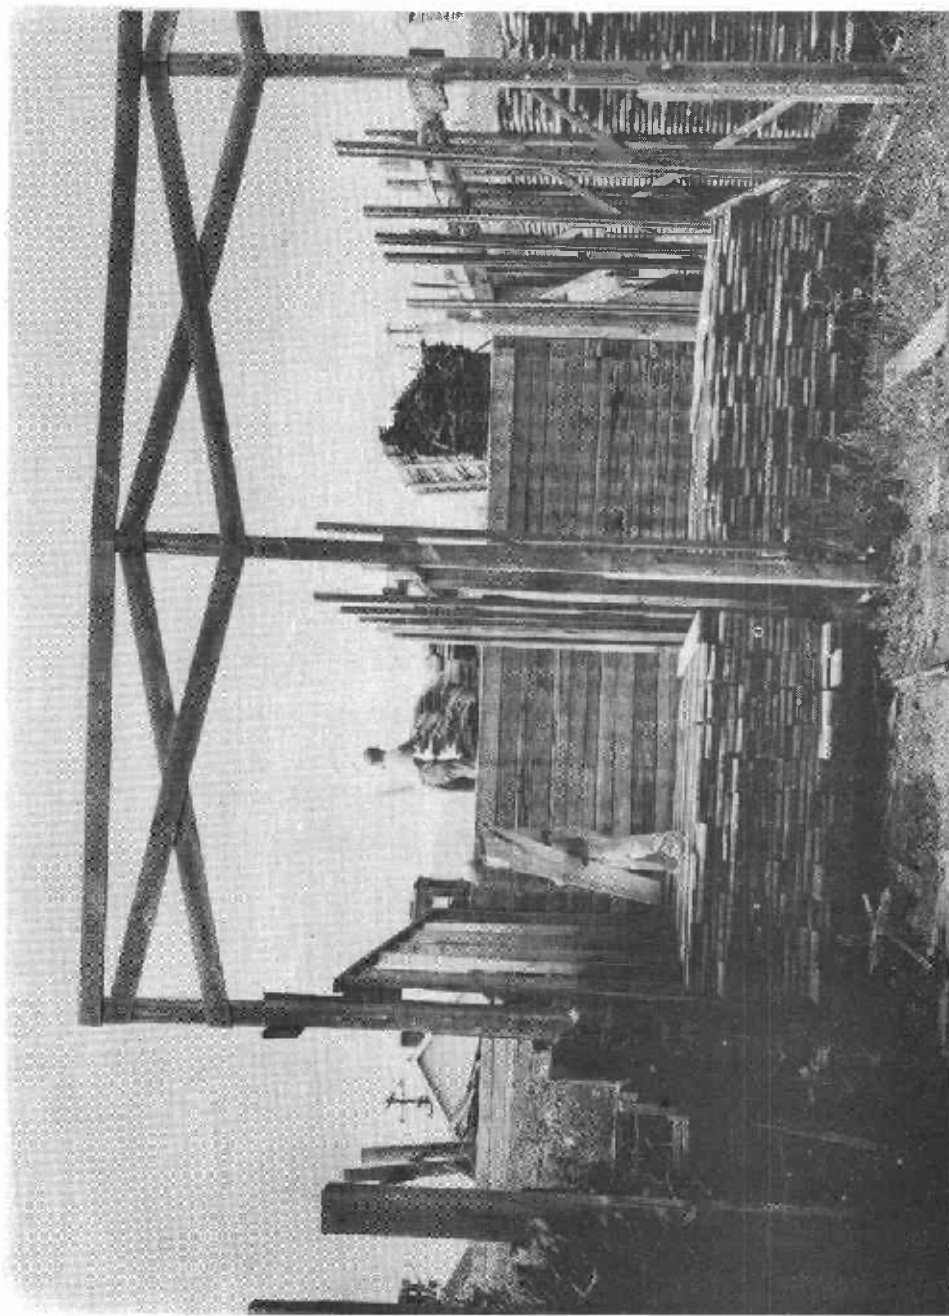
Sorted length or box piling of kiln-truck loads in stalls with sticker guides on both sides of load. Stalls built into side wall to facilitate handling of lumber to stacker from dolly.
